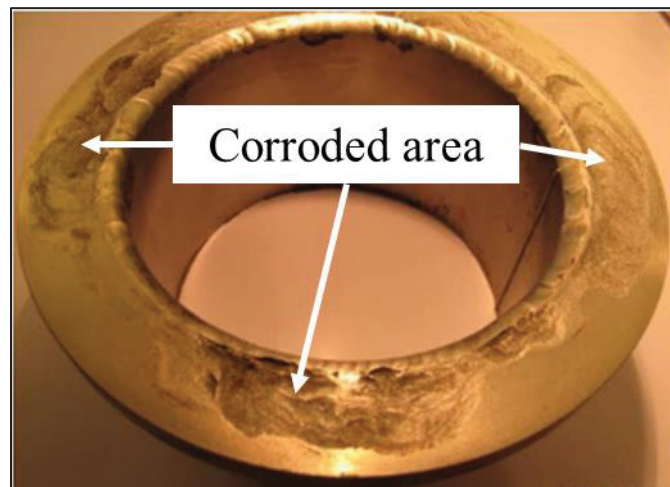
Crevice corrosion (locations indicated by the arrows) on the face of a UNS31254 SS flange
